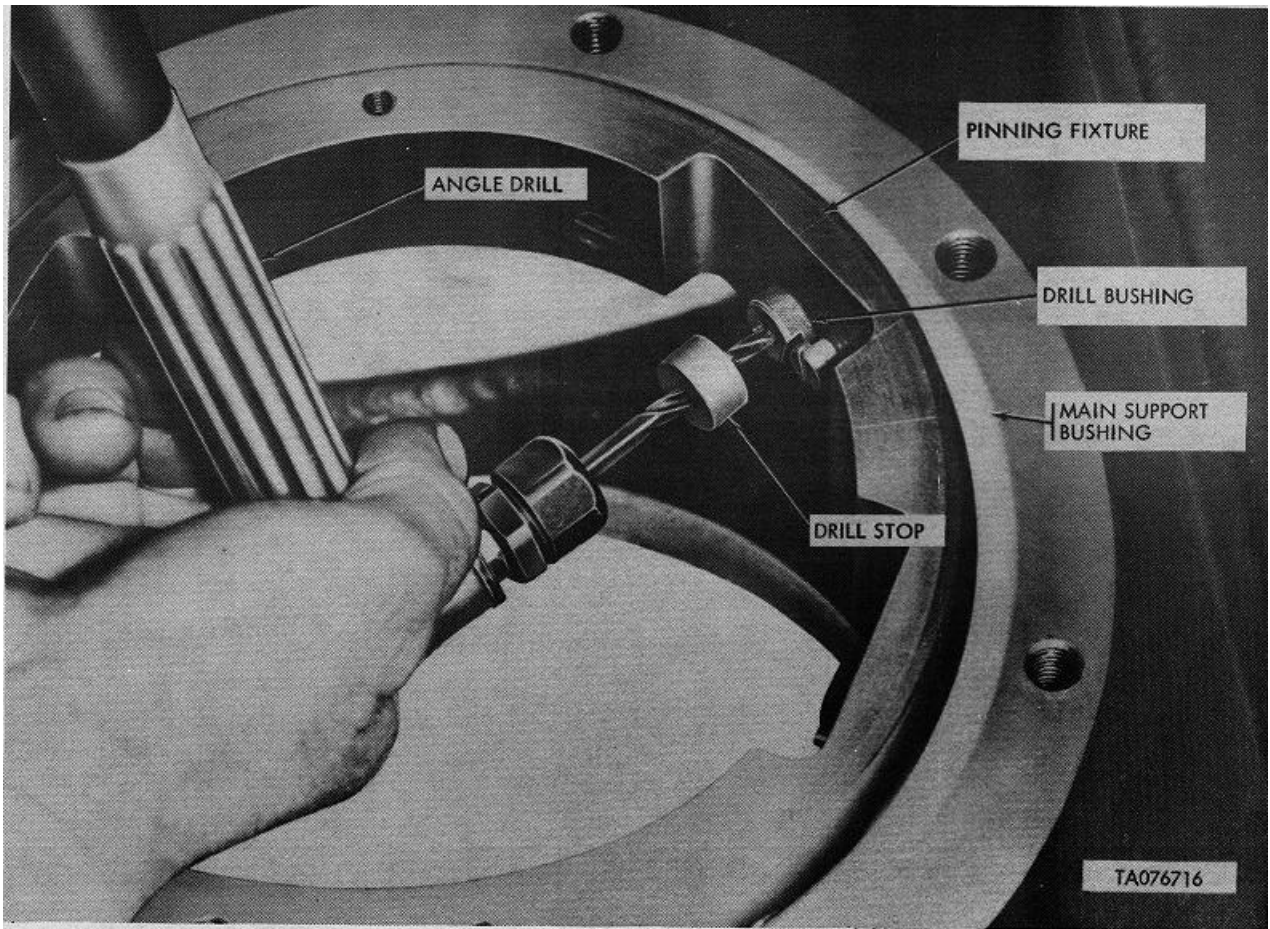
Main Support - Bushing Hole Drilling Using Pinning Fixture
